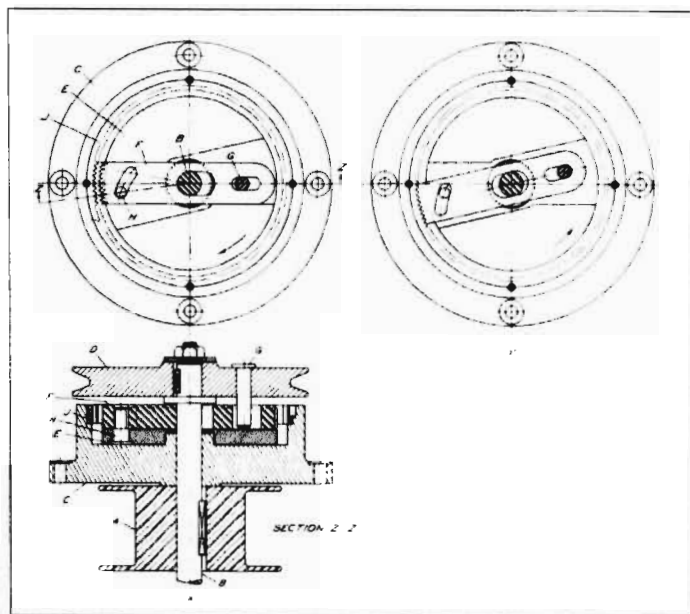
Drive mechanism arrests any reverse movement of driven shaft *B*.
